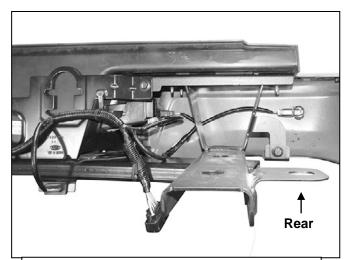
Unplug all harnesses. Remove hex bolts from bottom of bumper reinforcement (pictured) or receiver hitch to remove bumper assembly
